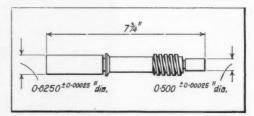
Surfaces at both ends of this worm-shaft are ground simultaneously
